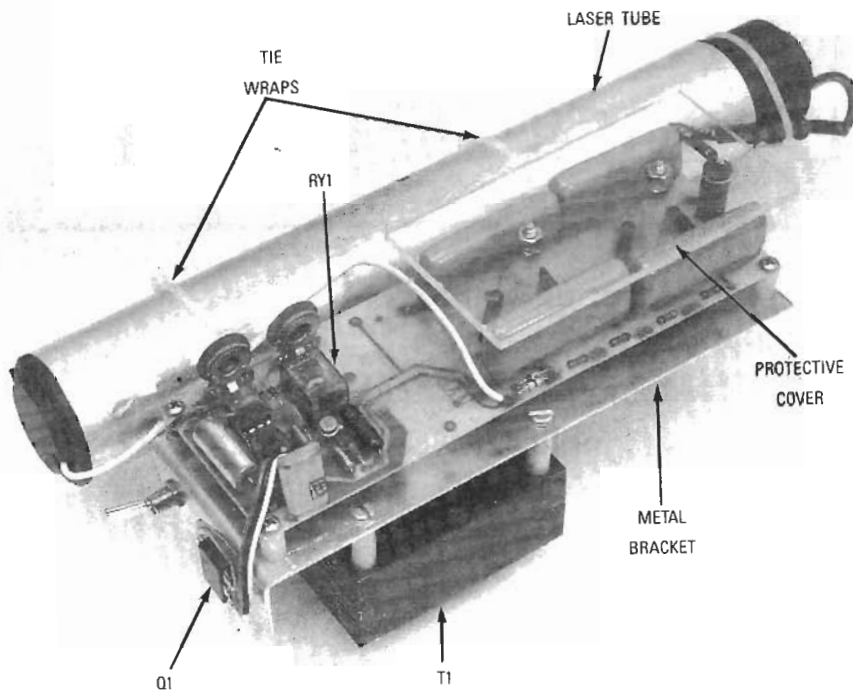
FULLY ASSEMBLED, the tube is held to the bracket with plastic straps.
